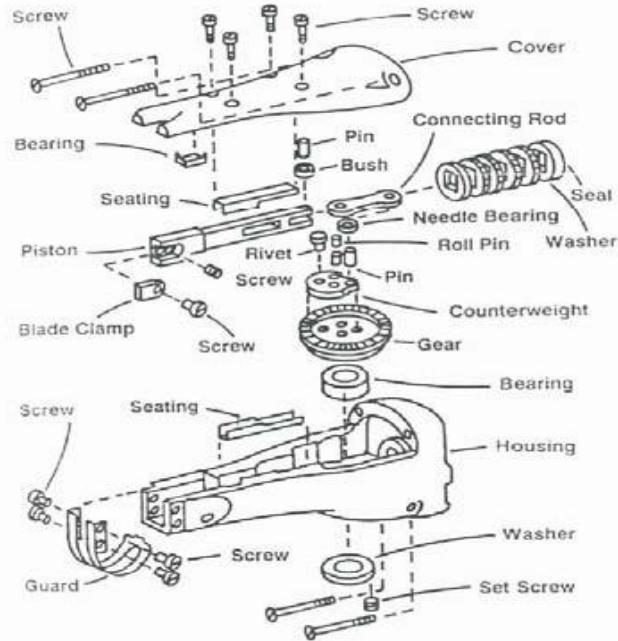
Power saw (initial design—41 parts, 6.37 min assembly time). (After Ref. 14.)
